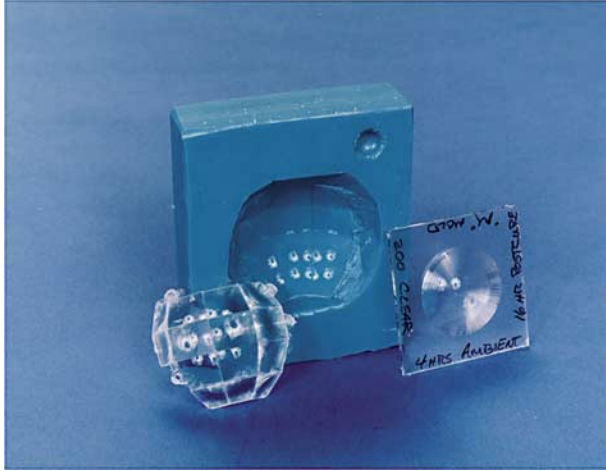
After using the fixture shown in Fig. 8 to produce the fly eye lens assembly from individually machined lenses, a room-temperature vulcanizing silicone mold, shown with uncut lens and molded lens assembly, was used to reproduce the lens assemblies.
